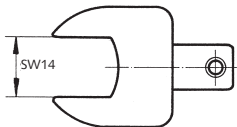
SW14 fork wrench insert for mounting and torque wrench Type 1300A71
